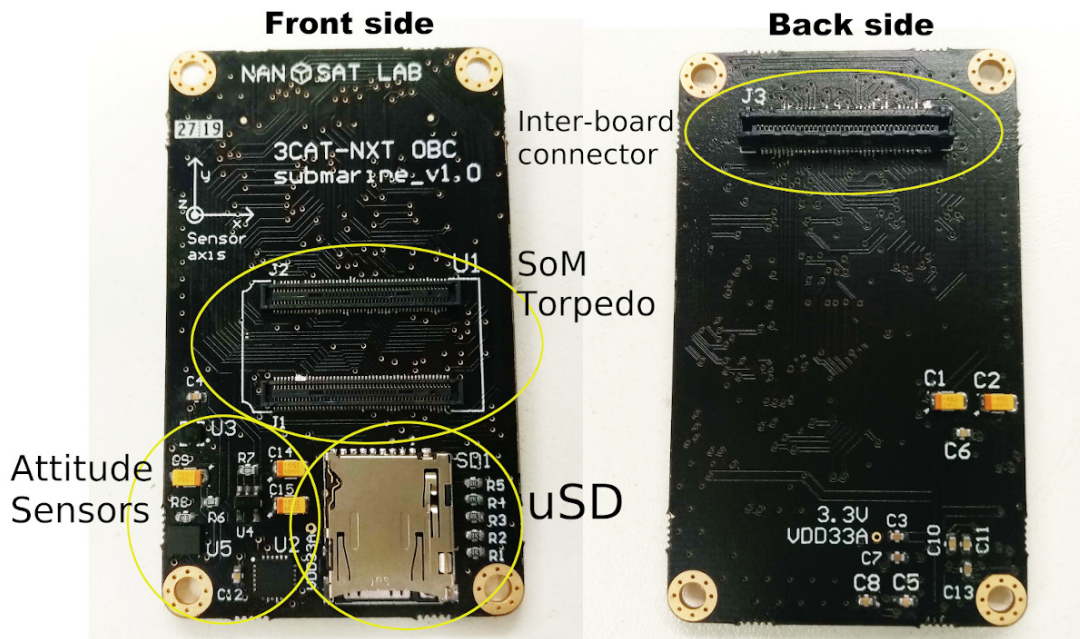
Submarine board soldered, indicating the position of main blocks
